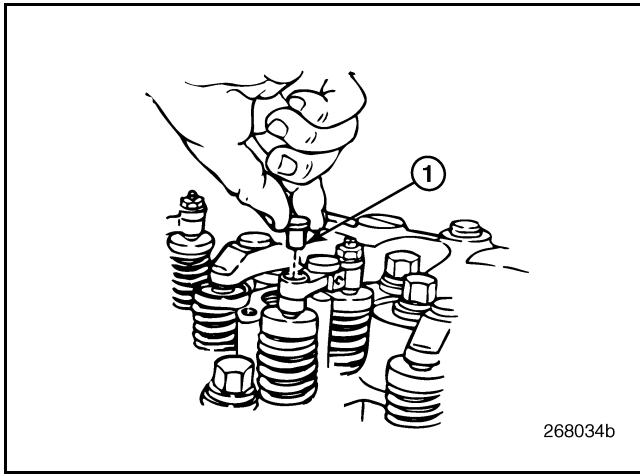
Installing Brake Actuating Pin in Exhaust Yoke
